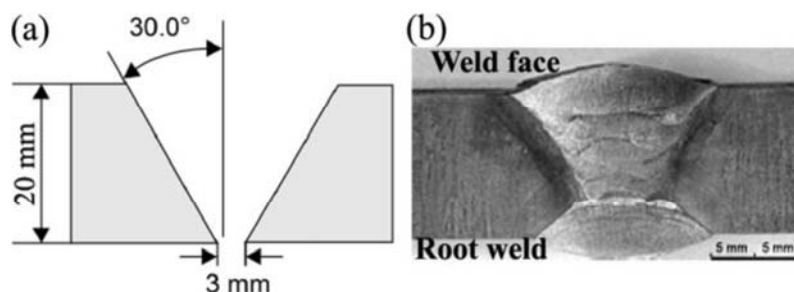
Super-TIG welding of 9% Ni steel butt joint (a) groove design (b) cross-sectional view of weld macrostructure
